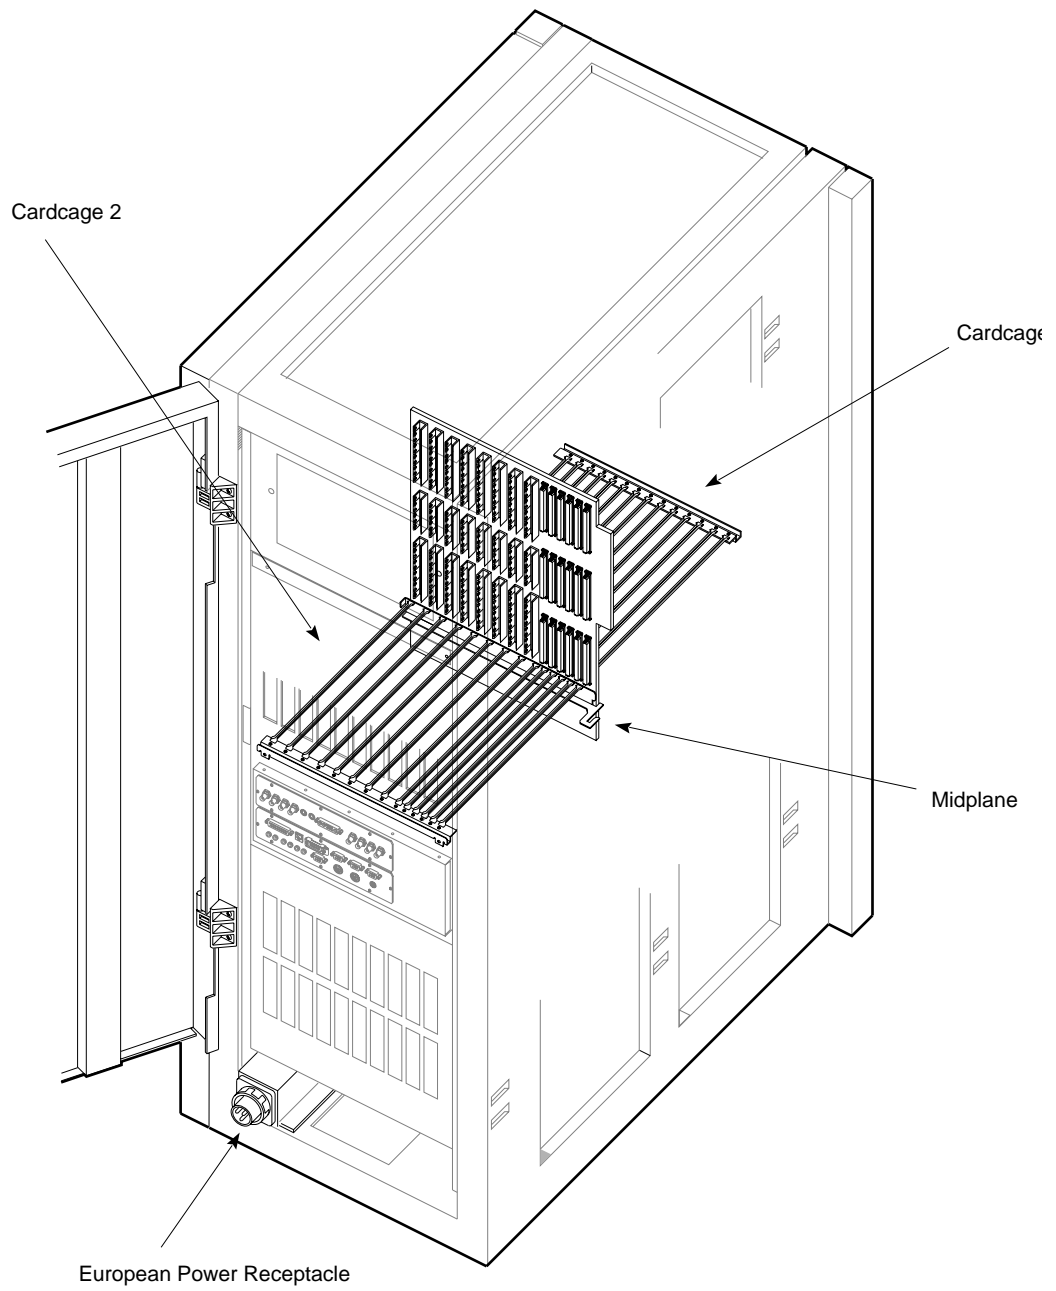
Rackmount Chassis Midplane and Standard Cardcages
